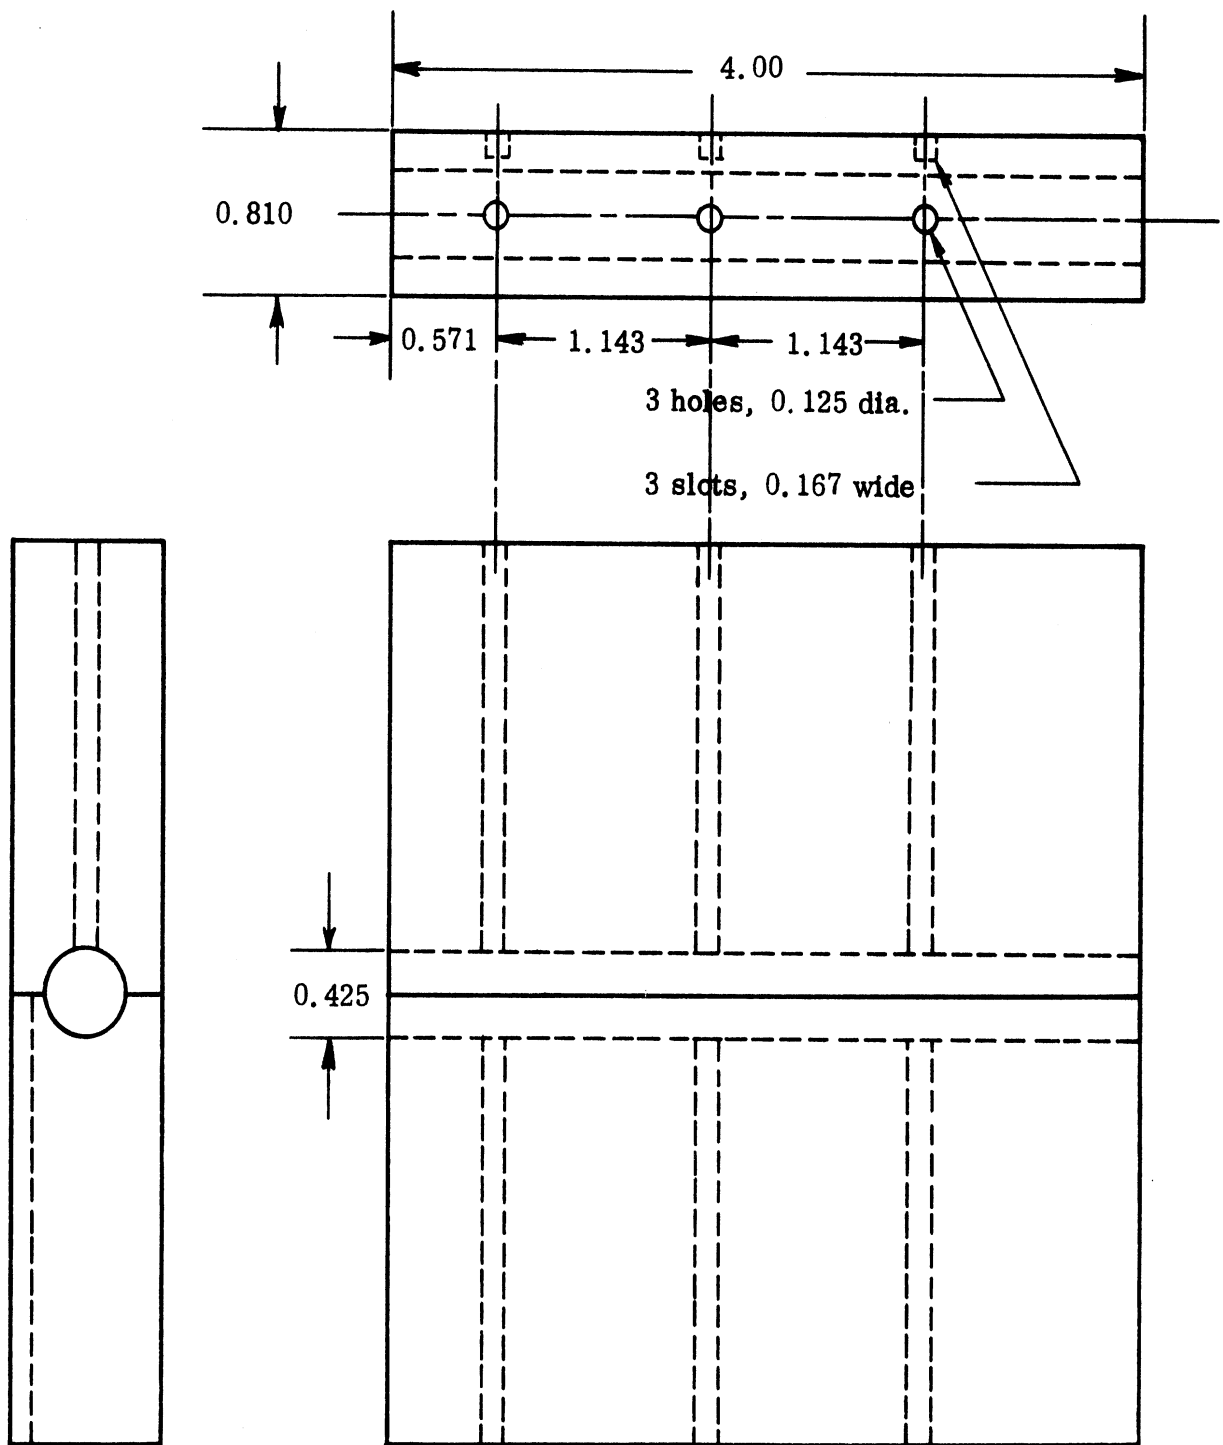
Typical size and shape of material samples designed to fit the Hewlett-Packard slab line; dimensions are given in inches.
